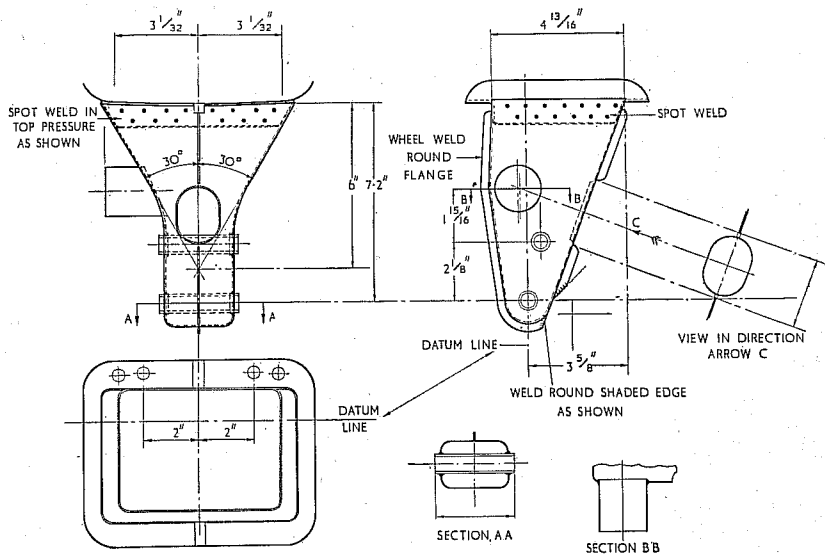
and 16a.—Method of assembling rear engine-mounting bracket
